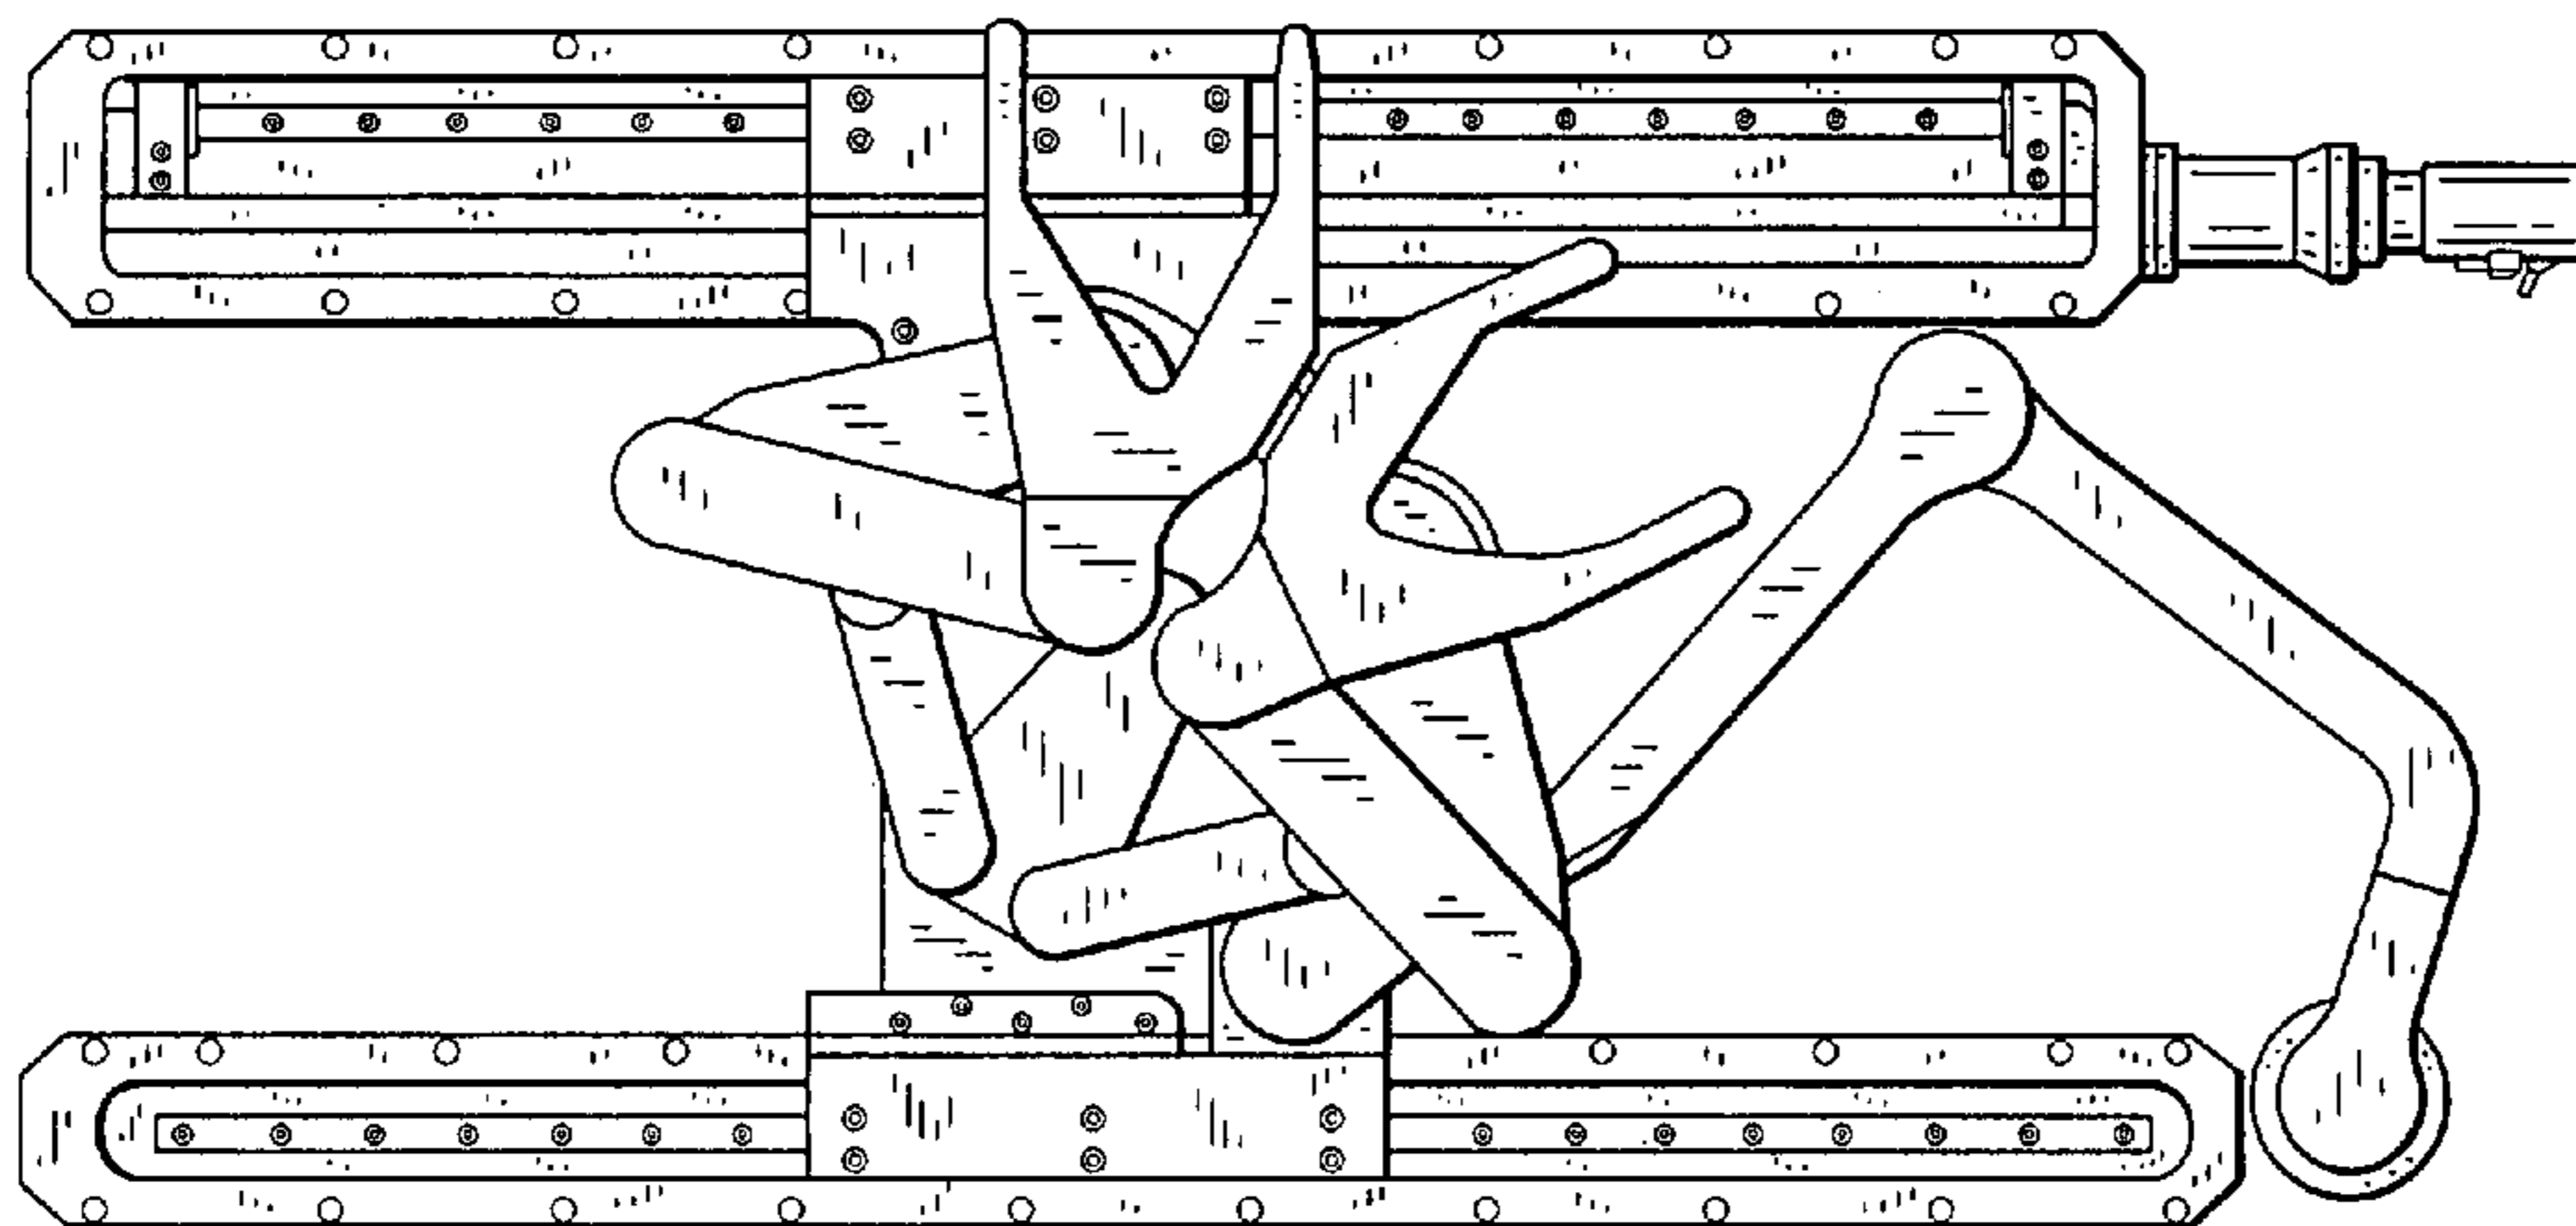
is a reference figure showing a perspective view seen from a back-right hand side of the apparatus.
